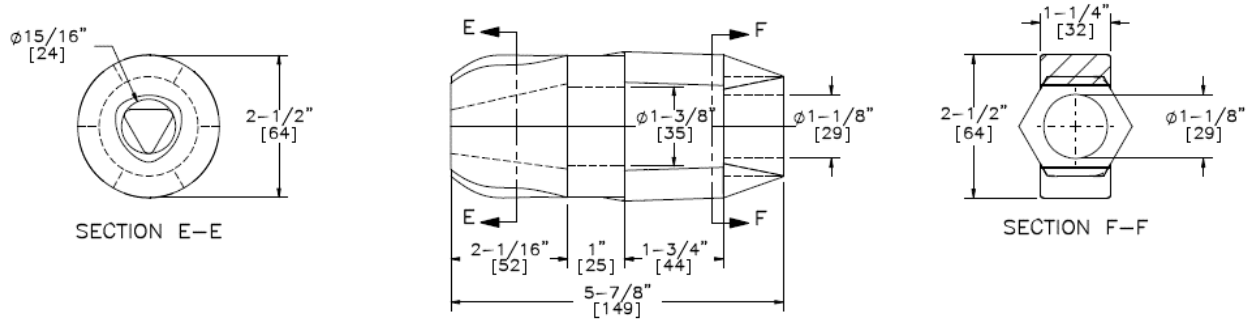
Bennett Bolt Coupler Dimensions, Model No. CGBBHT
